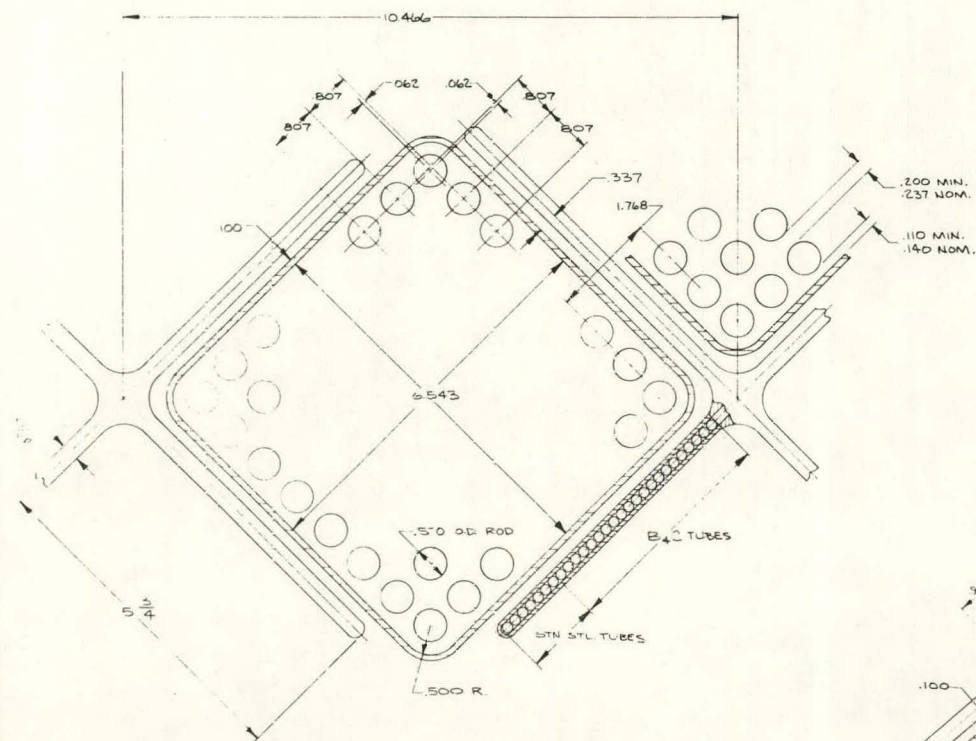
DRAWING OF 8 x 8 FUEL ASSEMBLY
